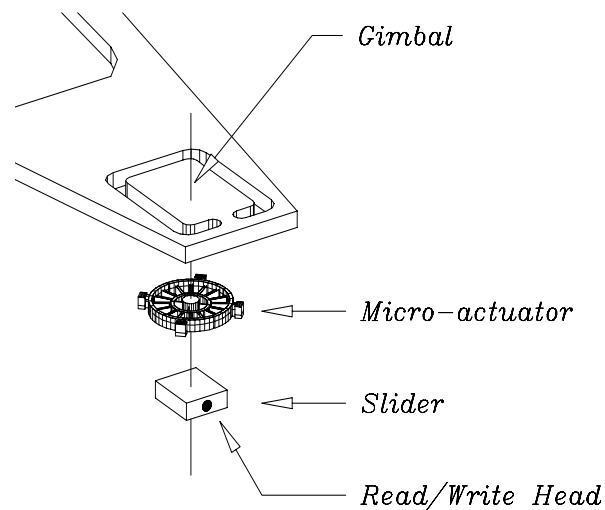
Exploded view of micro-actuator assembly. The micro-actuator is sandwiched between the slider and the gimbal at the end of the arm.
